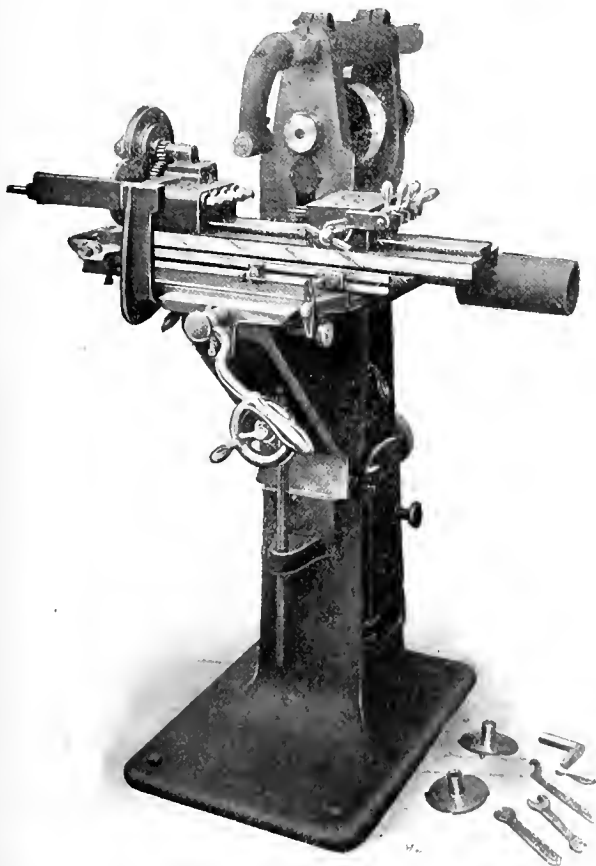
Small Miller, arranged as an Automatic Tap Fluting Machine.
